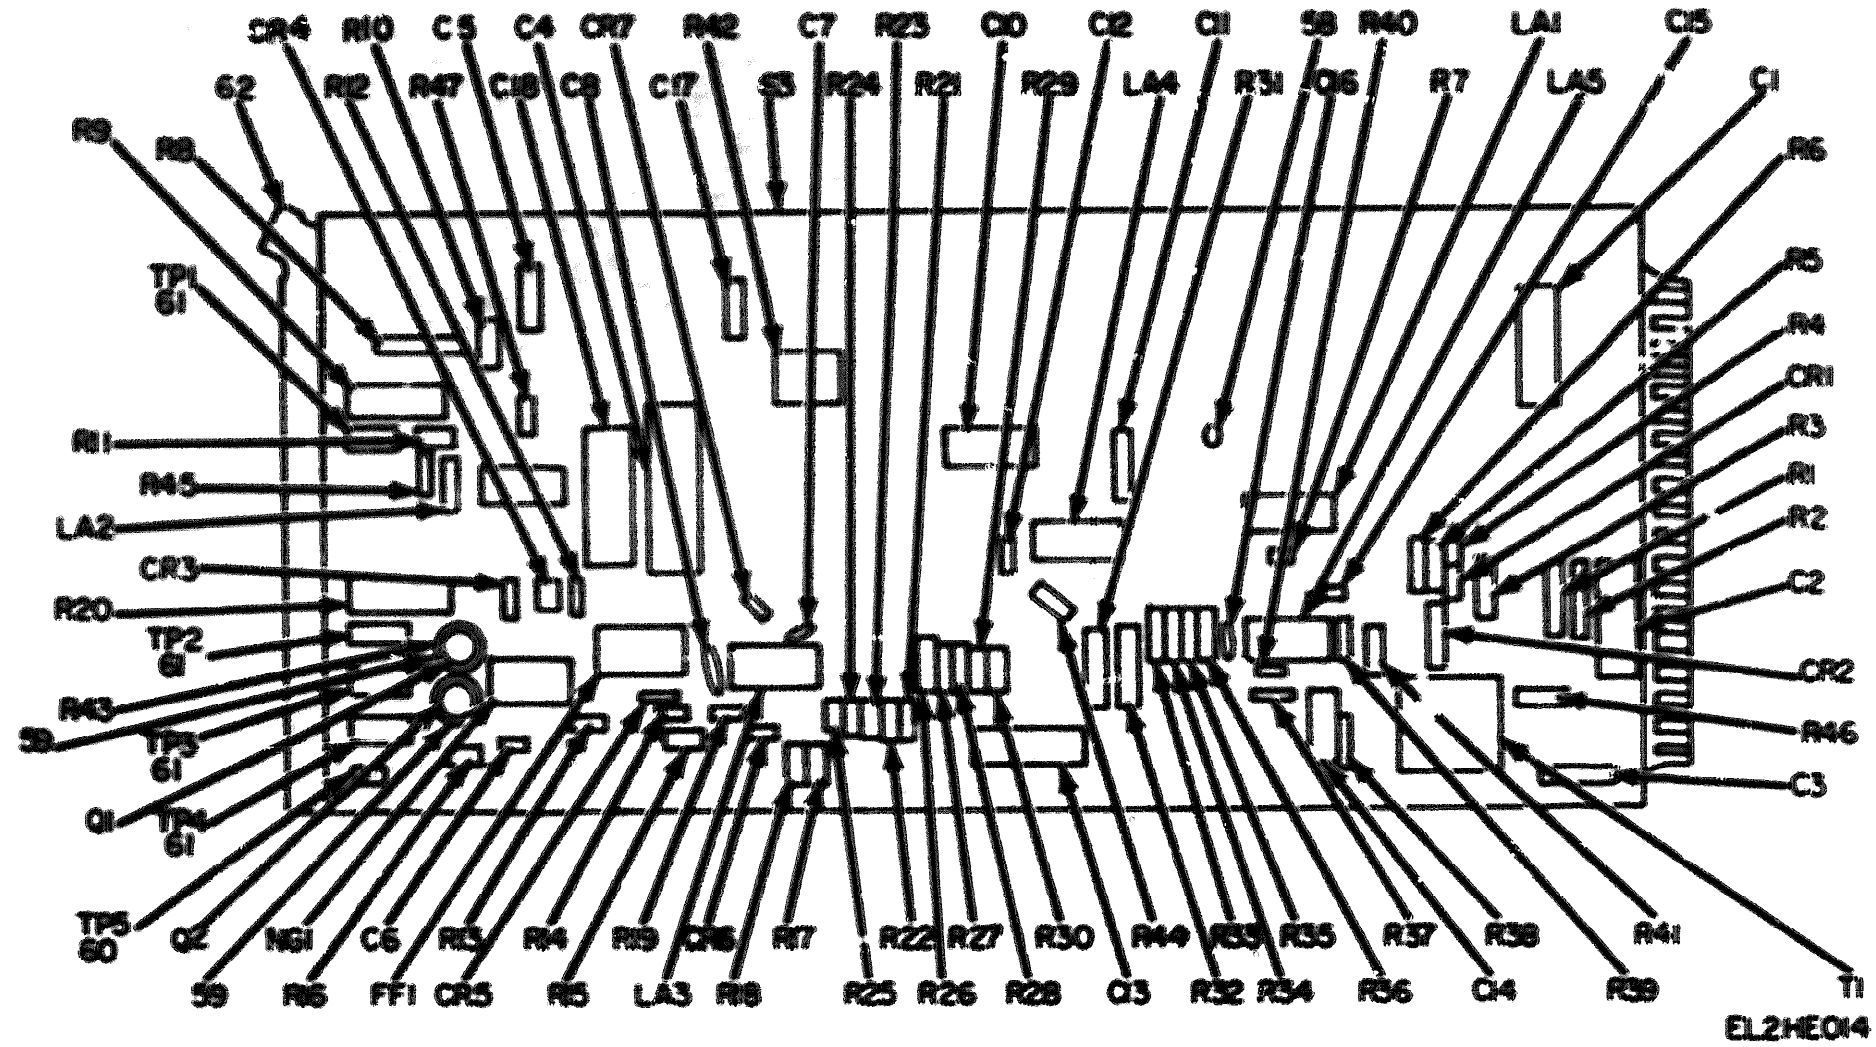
Circuit Card Assembly, AM Tone Keyer (Telesignal 47A)
